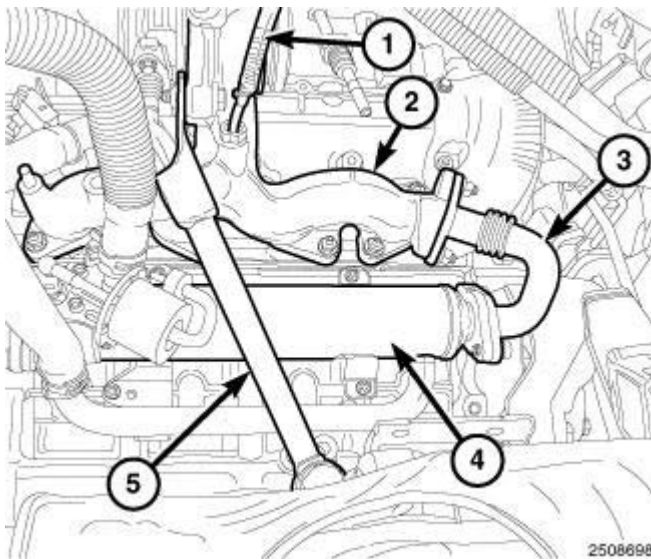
EGR Tube , Exhaust Manifold & EGR Cooler
